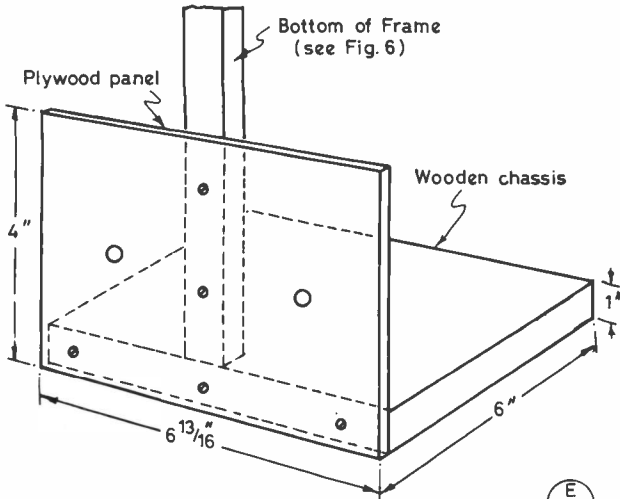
CHASSIS AND PANEL ASSEMBLY
